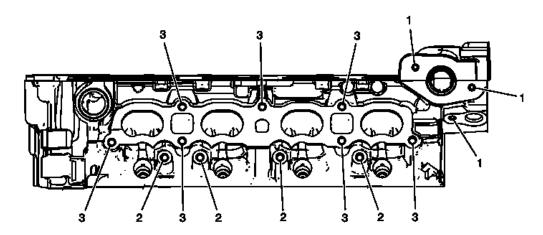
Locating Bolts On Cylinder Head - Top View Courtesy of GENERAL MOTORS COMPANY
